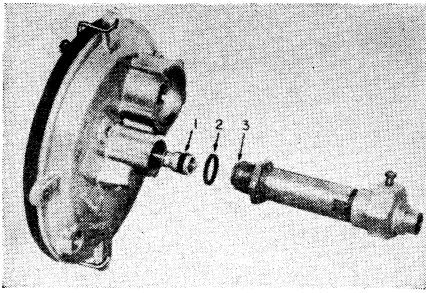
Press leather seals (1) and (2) into place in center plate. Seal (1) should be flush with bottom of hole and seal (2) should rest against shoulder in center plate. On Hydrovacs without fast application valve seal (1) is not used and seal (2) should be pressed into center plate until flush with bottom of hole.
